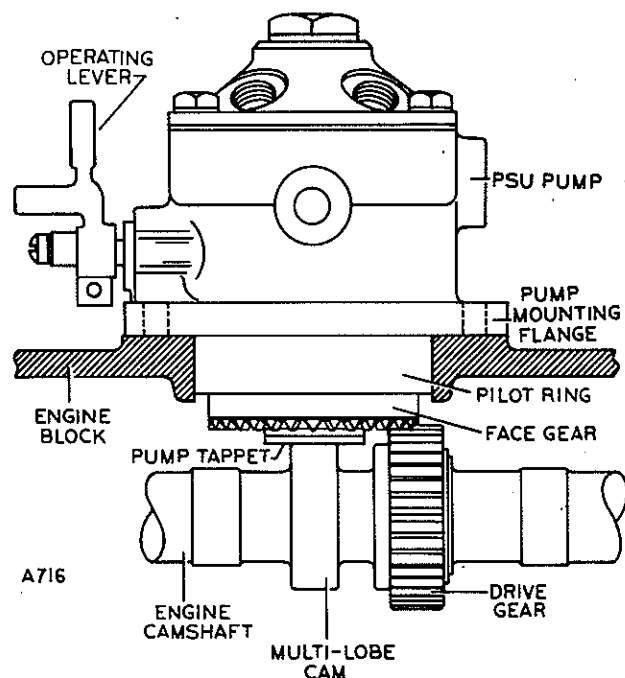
INJECTION PUMP IN RELATION TO ENGINE CAMSHAFT
